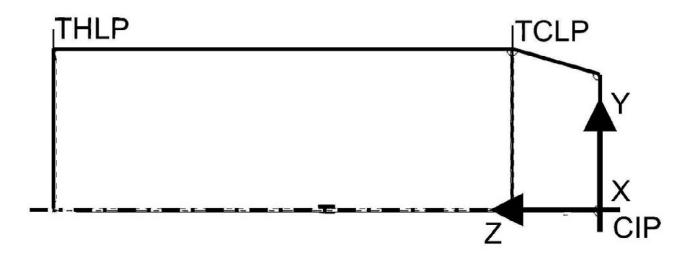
Thread-cutting tap with offset shank — Sketch of cutting part
